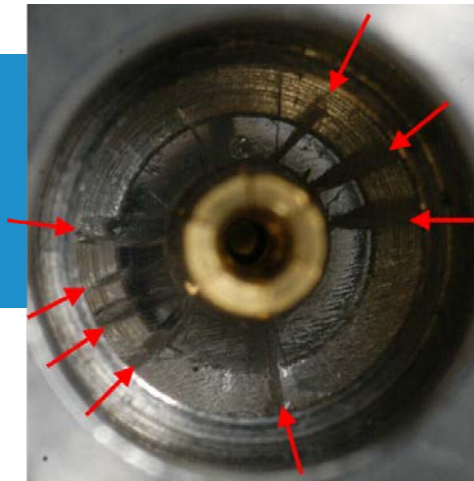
N-type coaxial attenuator connector with cracked center contact supporting disk, which caused poor measurement repeatability. The arrows indicate the cracks in the dielectric supporting disk.
